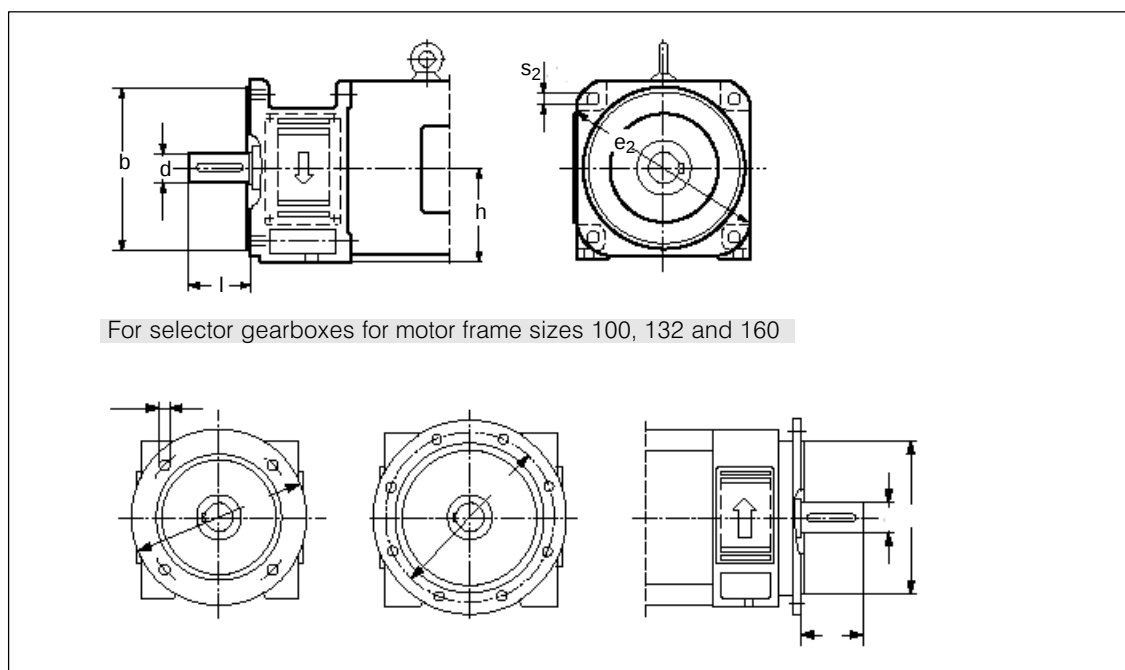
Flange dimension for AC motors (dimensions refer to Table 3-10)
